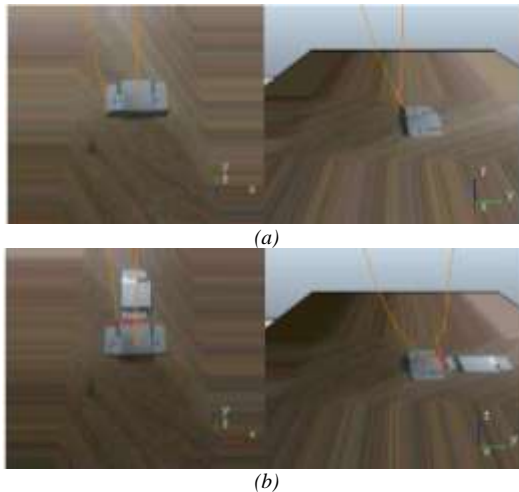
Processed metal object; (a) Sealing process, (b) Welding process
